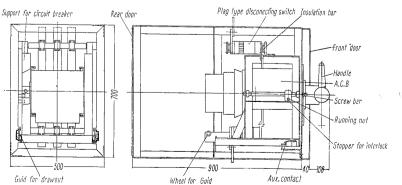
Detailed view of enclosed box for air circuit breaker (3P 1000 A)
